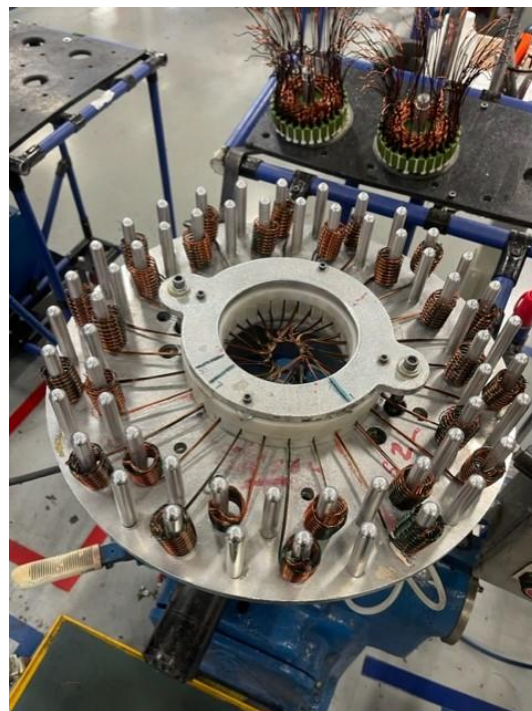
Old Winder Loading Rack & Clamp Assembly
